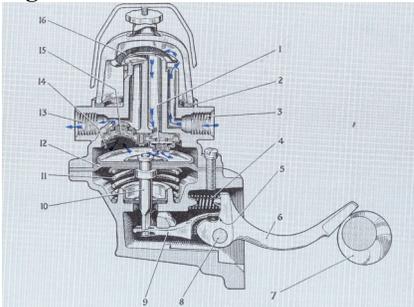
Basic fuel pump components. 1) inlet valve, 2) bowl cover joint, 3) fuel inlet, 4) operating arm return spring, 5) abutment on operating arm, 6) rocker arm, 7) eccentric on camshaft, 8) pivot, 9) connecting link, 10) pull rod, 11) diaphragm return spring, 12) diaphragm, 13) fuel outlet, 14) pump chamber, 15) outlet valve, 16) fuel screen.
